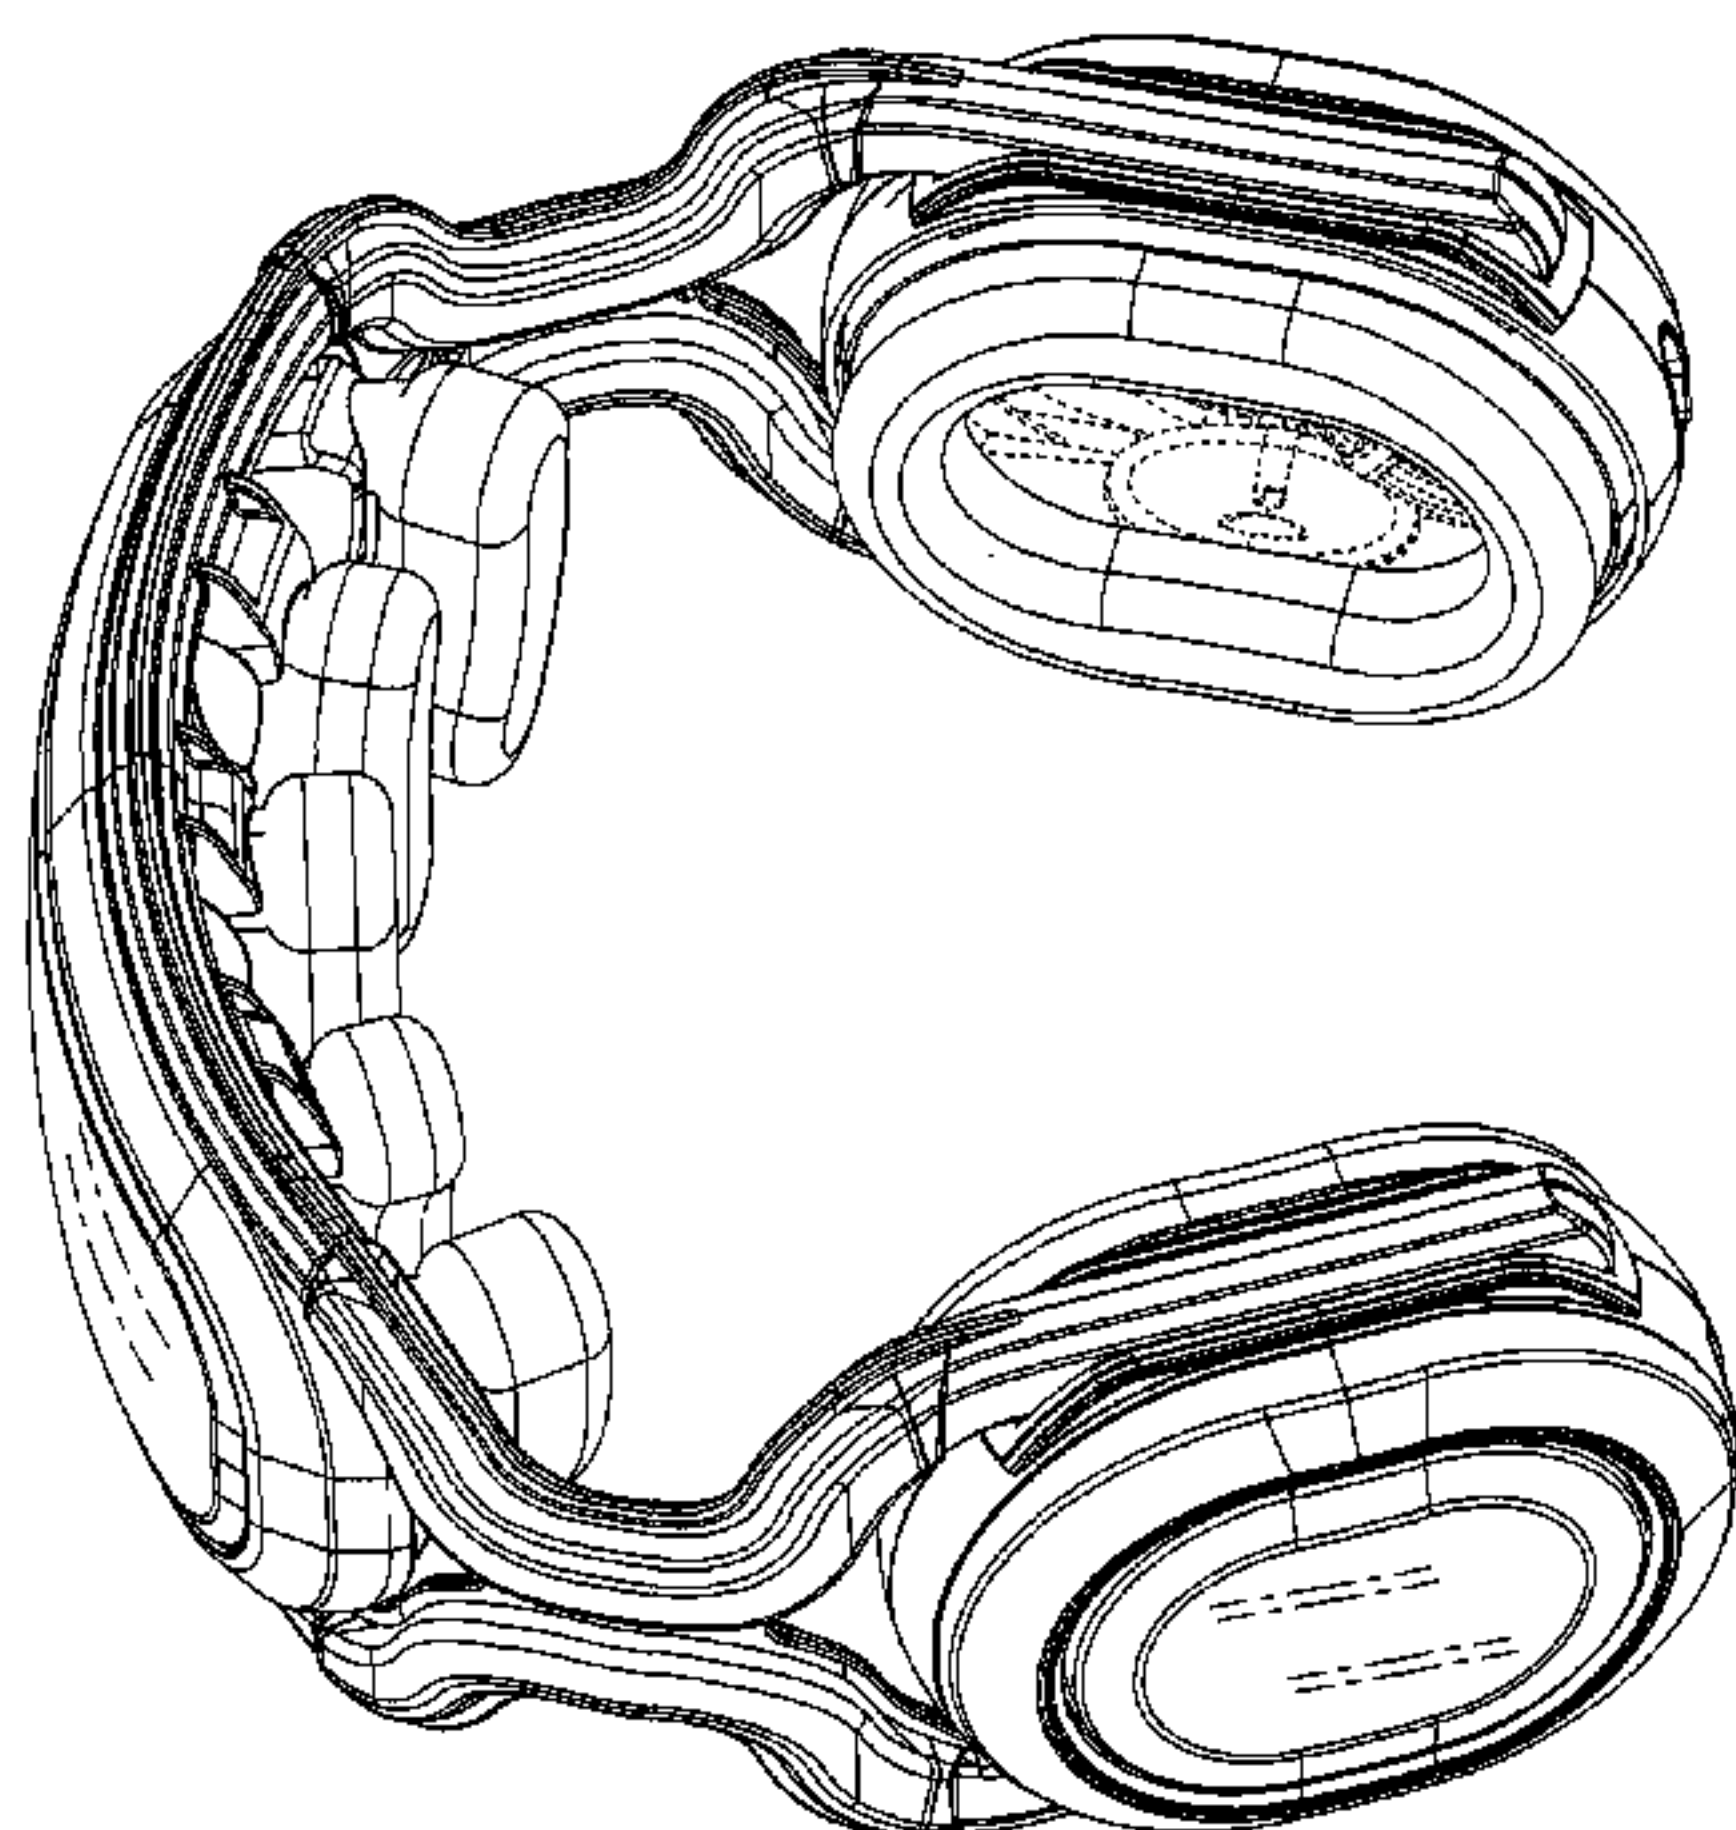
is a side perspective view of the headphones with adjustable earpieces and transparent top speaker and earpiece panels, depicting the left and right earpieces in retracted position showing our new design;
